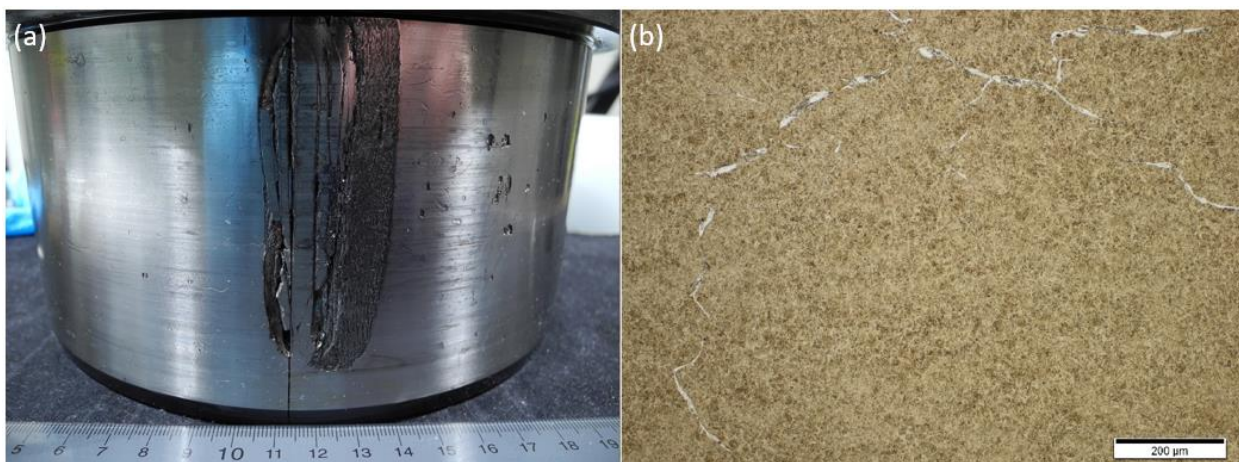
(a) A wind turbine bearing that has experienced macro-pitting damage; (b) a section of the crack shown in (a). Image taken from [9]
